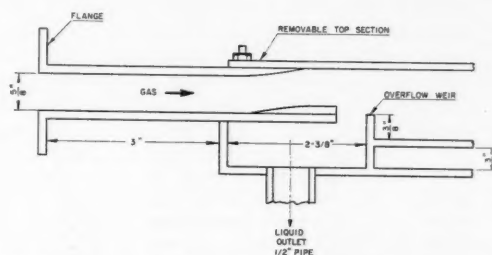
Test section details; 1/8 in. sheet steel throughout inlet cross section and cross section for gas flow over liquid: 5/8- by 4 1/16-in. length, 48 in. between weirs.
